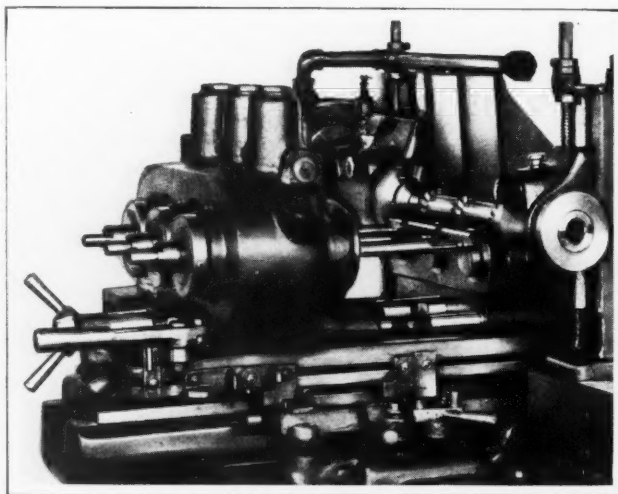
Plain Automatic Milling Machine Equipped for Spline Milling; Fixture Indexes Automatically
